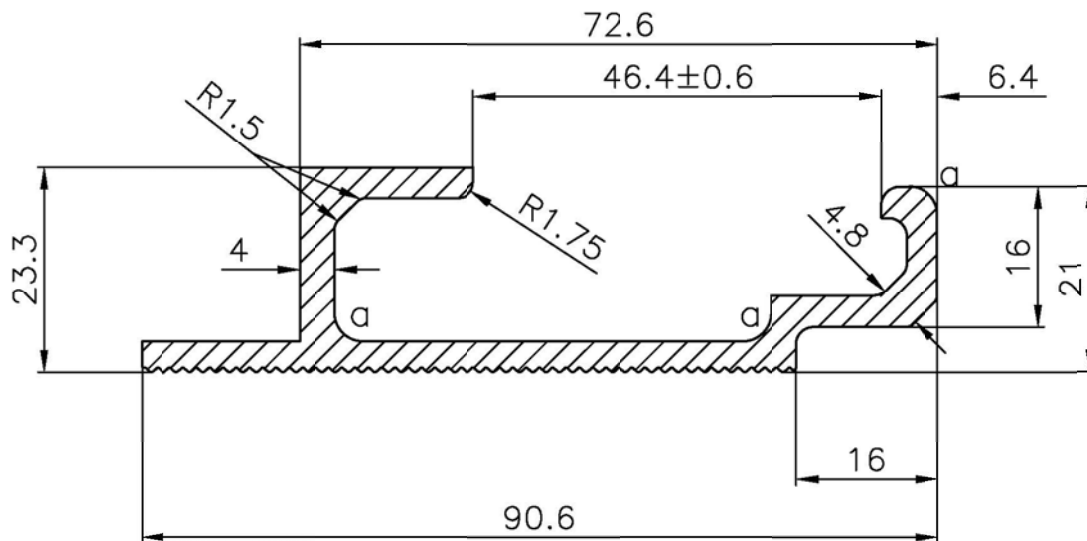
CLIP AND RAIL CROSS-SECTIONAL DIMENSIONS
